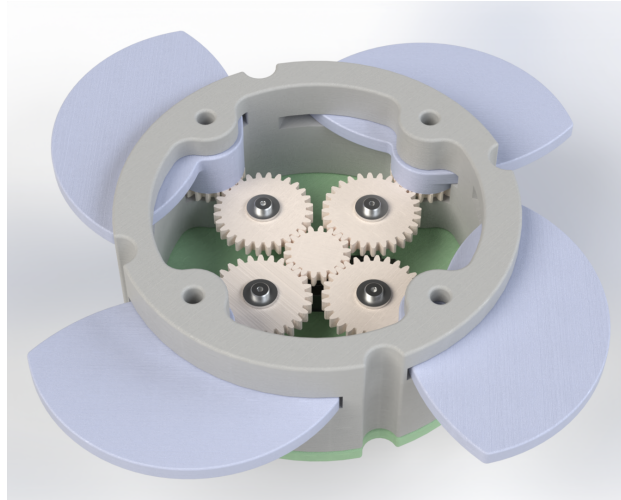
CAD of Air Brakes mechanism with fins deployed.
